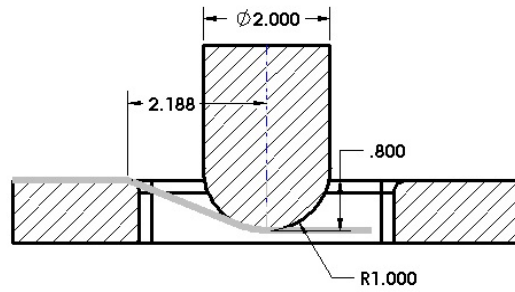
Hemispherical 1-inch-radius end punch's detail and top and bottom views
